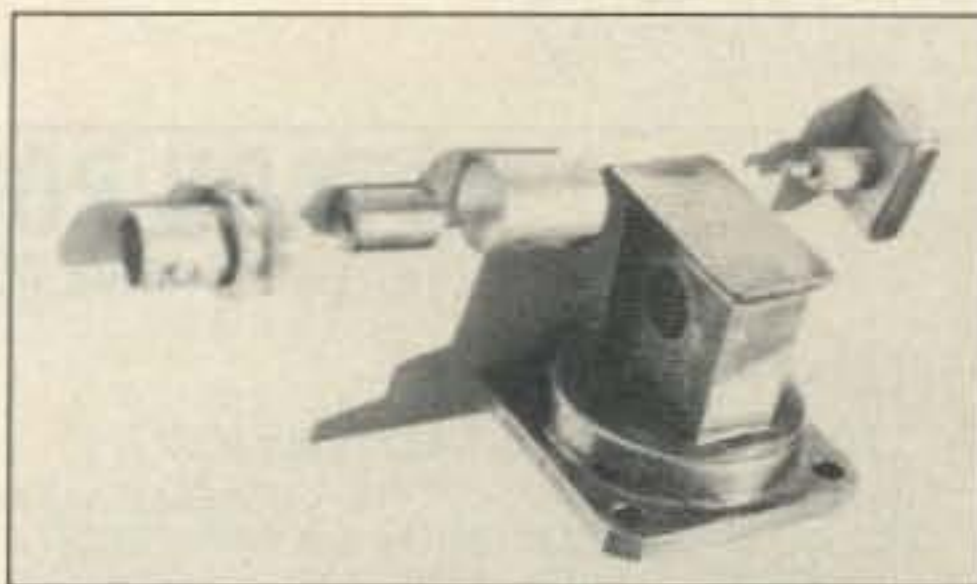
Photo A. Pre-assembly of detector mount with modified top section. Brass tube is soldered over the large hole on top of the waveguide. BNC nut is then soldered to the top of the brass tube.
